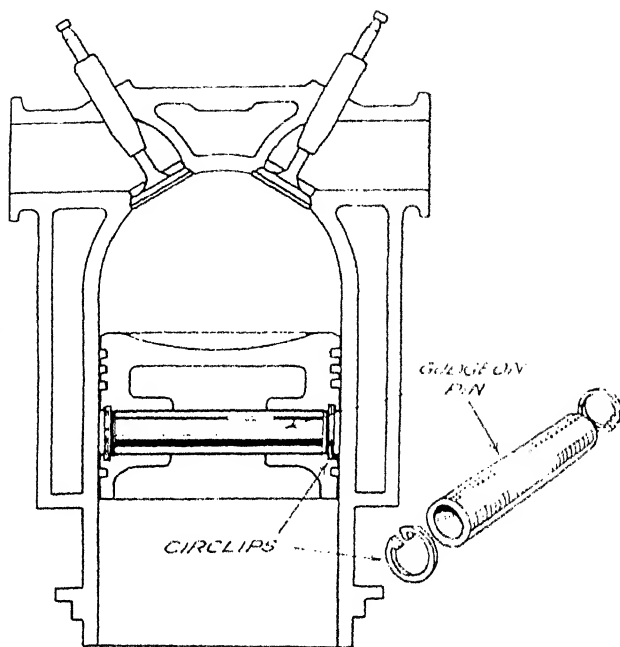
CYLINDER ASSEMBLY SHOWING GUDGEON PIN.
